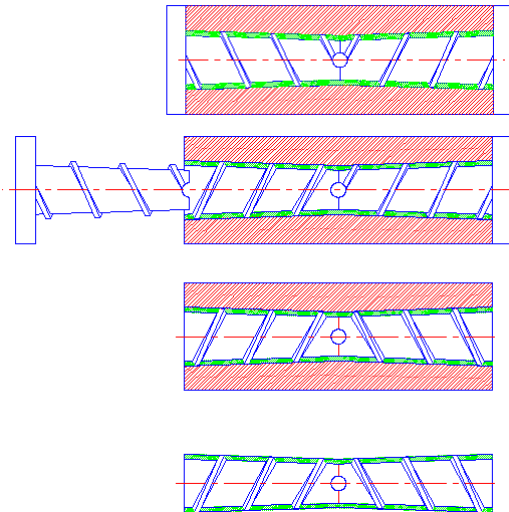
The die after moulding and the removal of the ready made part (The inlet is not shown.)
